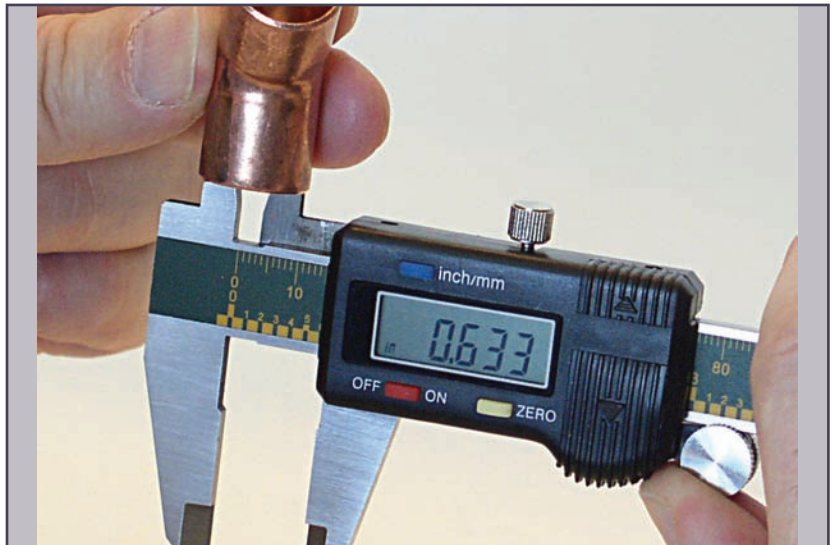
Slide the inside jaws into the opening, and open the caliper until the jaws contact the surface. Wiggle the component and your caliper to make sure you're measuring at the exact widest point in the opening.
